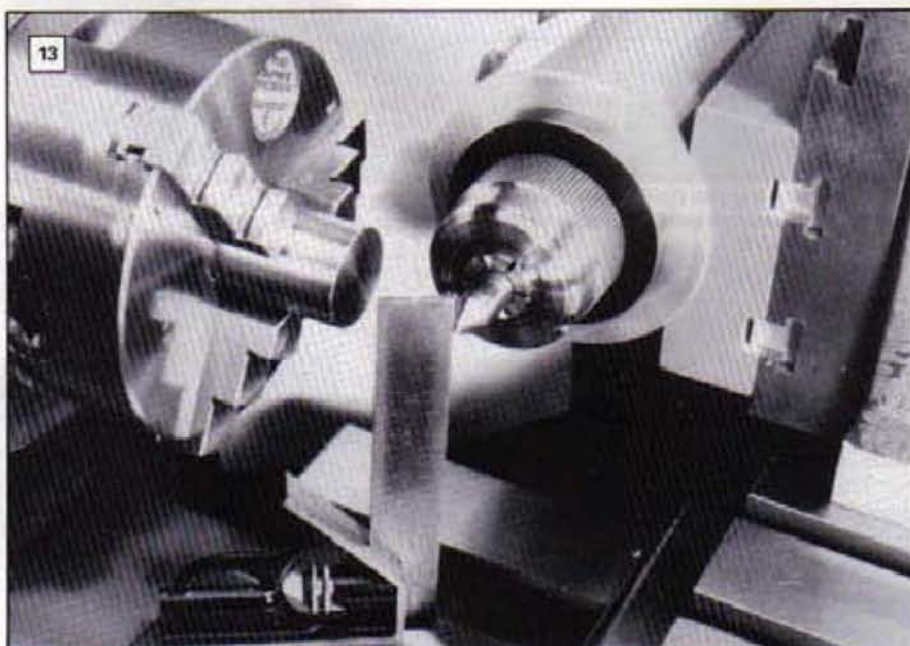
Set-up for drilling the pin hole in the ball arm; start with a centre drill and continue with a $\frac{1}{8}$ in. Photo 12. Parting off the machined ball arm. Photo 13. Setting the milling head height with a combination square. Photo 14. Milling the flats for the pin holes. Photo 15. With the milling equipment set up on the cross slide, the slot in the handle body can be cut. Photo 16. Milling the countersink in the handle body.
